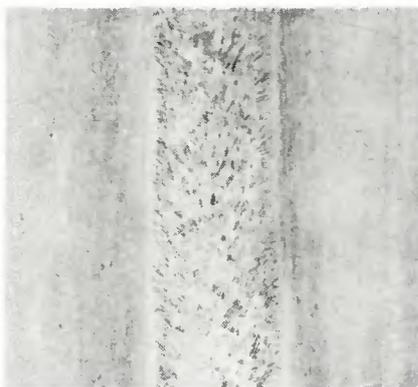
Longitudinal section (top to bottom) through a vertical electroslag weld made in 4½ in. Incoloy alloy 800 with Inconel filler metal 82
